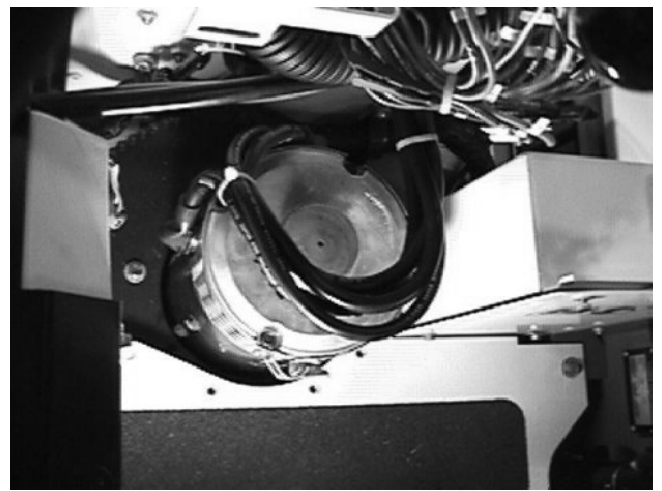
NEW CABLE ROUTING, PROPEL MOTOR
